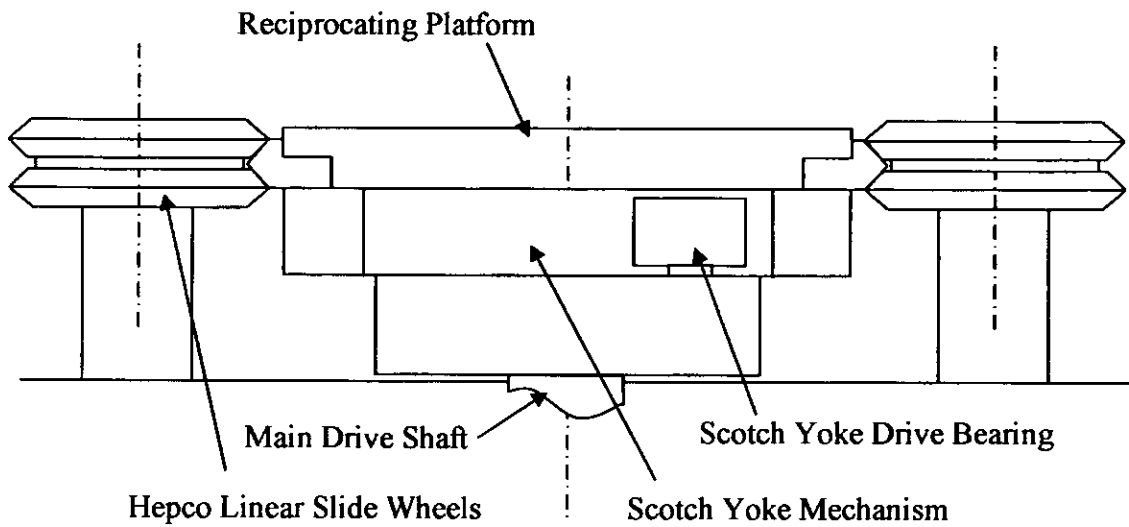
Scotch Yoke and Linear Slide assembly.
